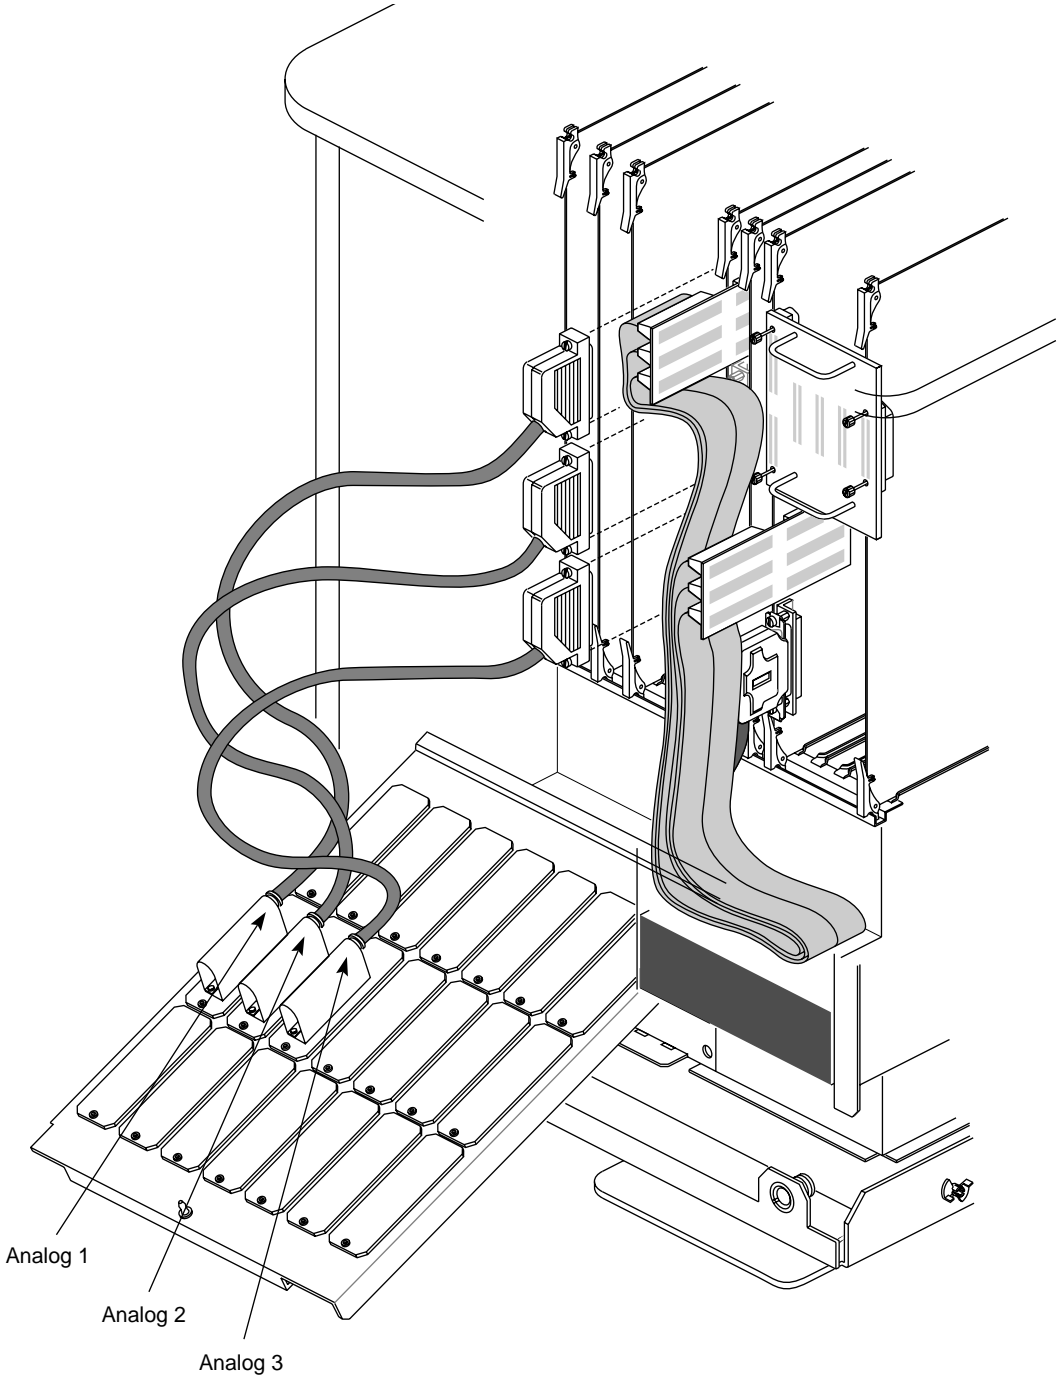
Complete Multi-Channel Option Installation for the Onyx Deskside Chassis (Breakout Box Version)
